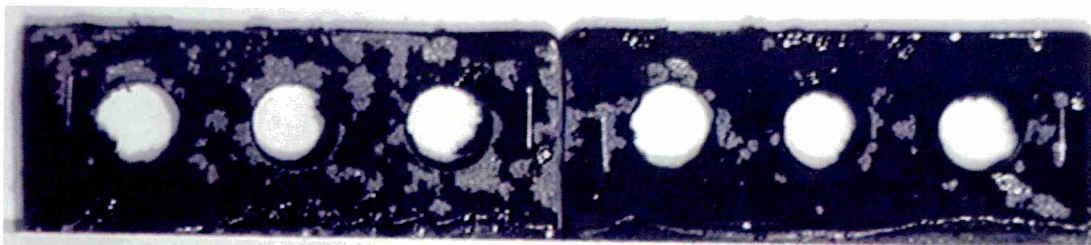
Alumina grit blast + Accomet C fracture surface after environmental exposure
